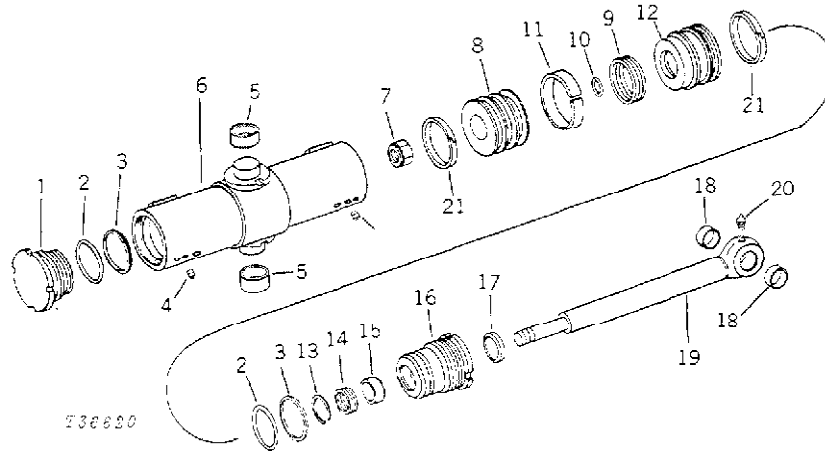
Backhoe Bucket Cylinder Assembly
